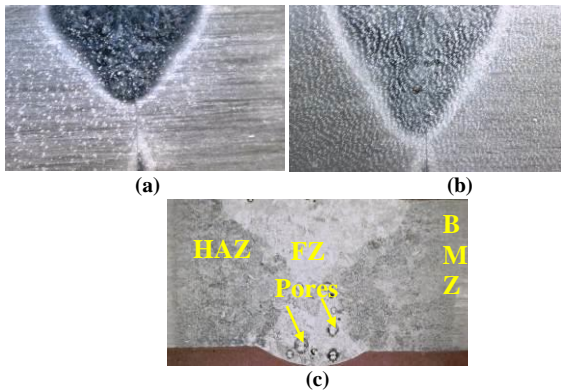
Weld bead macrographs for Exp. No. (a) 1, (b) 2 and (c) 3
